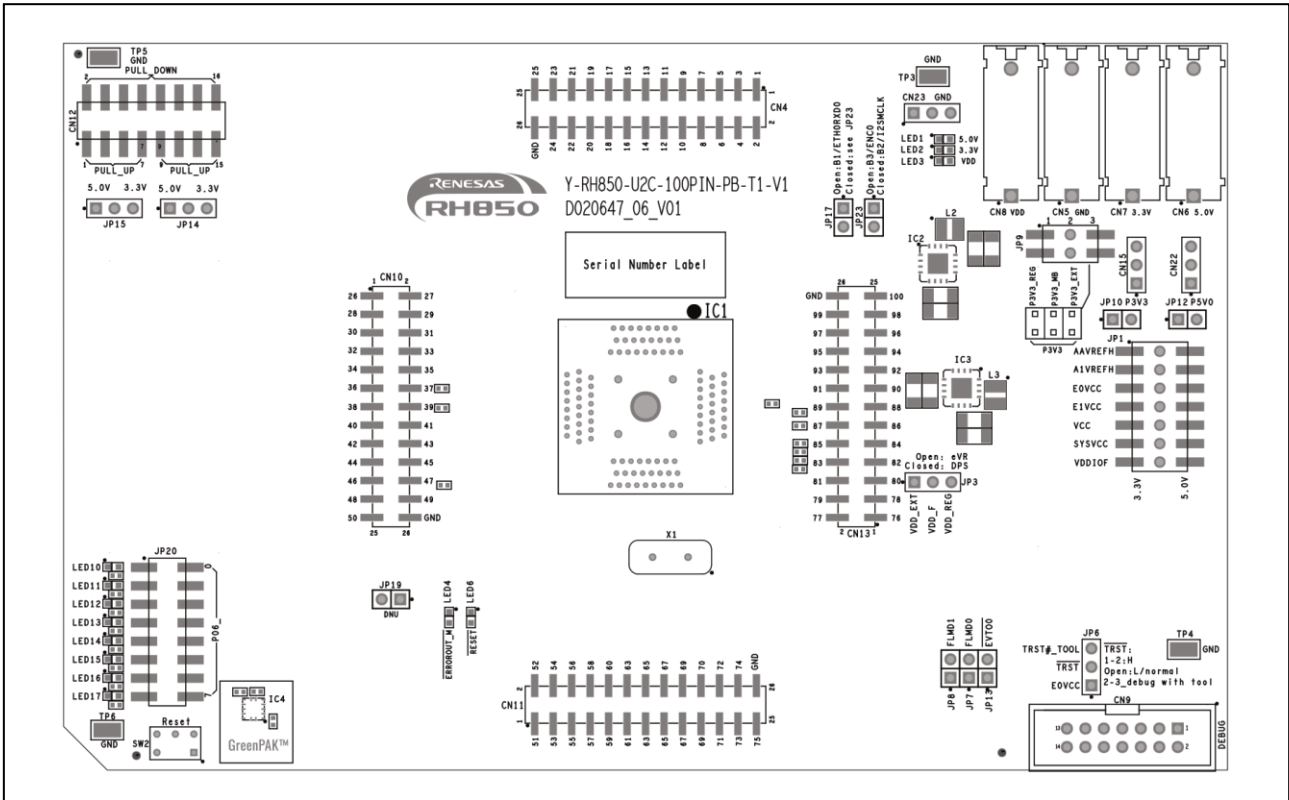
Piggyback board top view of board version D020647_06_V01
